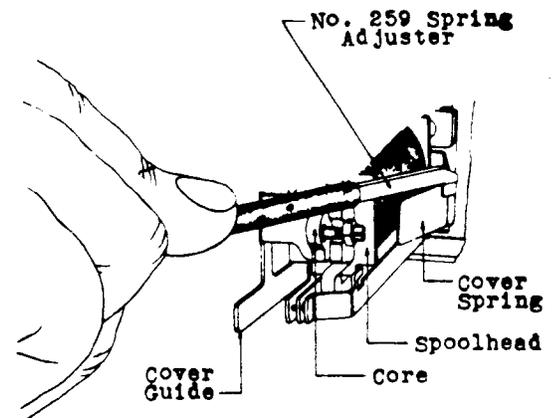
Method of Adjusting for Cover Spring Pressure
